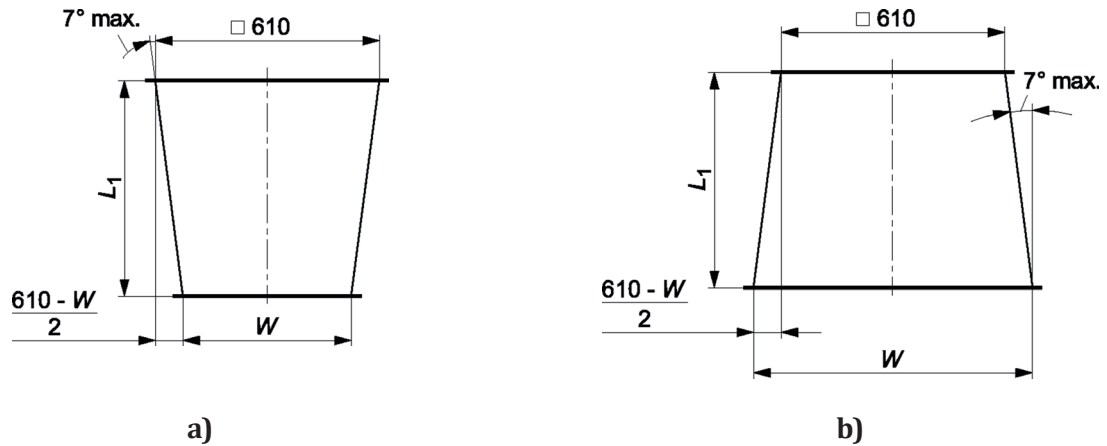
Details of transition ducts for mounting filters which are smaller (a) or larger (b) than the test duct
